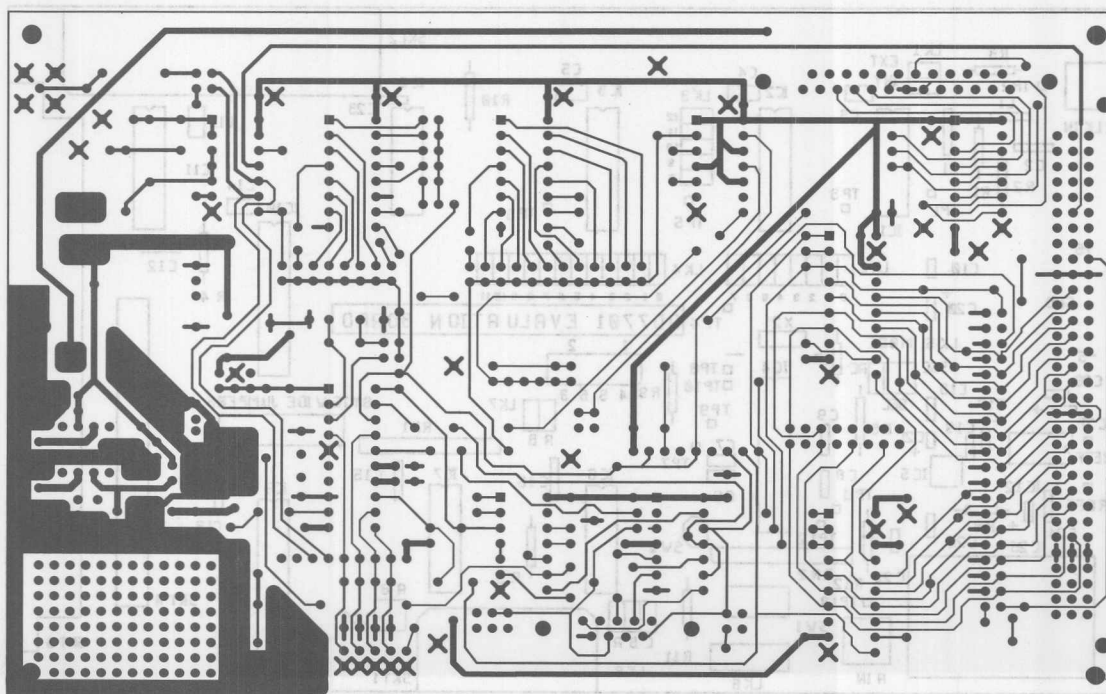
AD7701/AD7703 Evaluation Board Solder Side Layout
